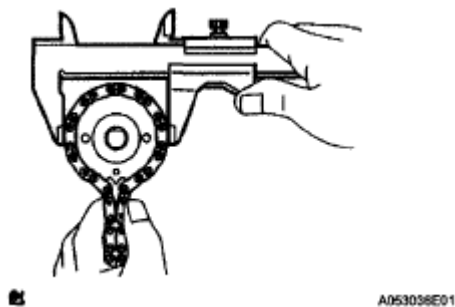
Measuring Drive Shaft Gear Diameter With Chain
